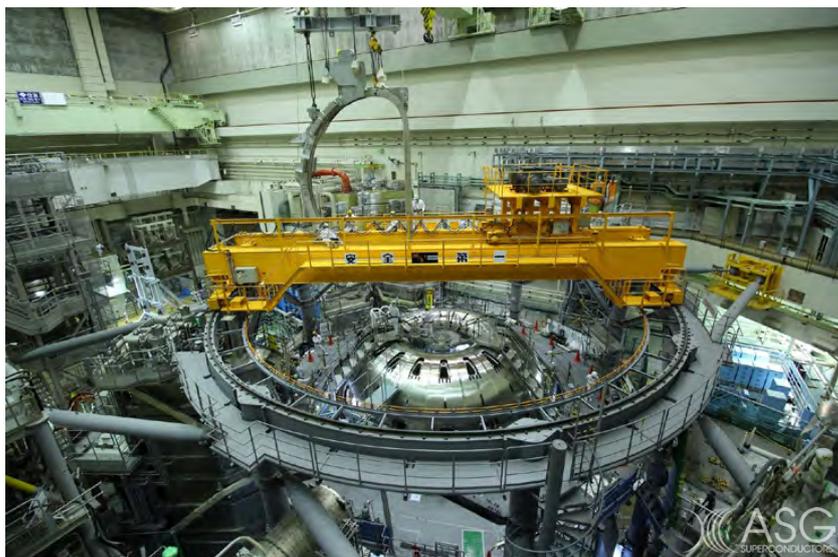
TFC assembling on the machine (Courtesy of JAEA)
